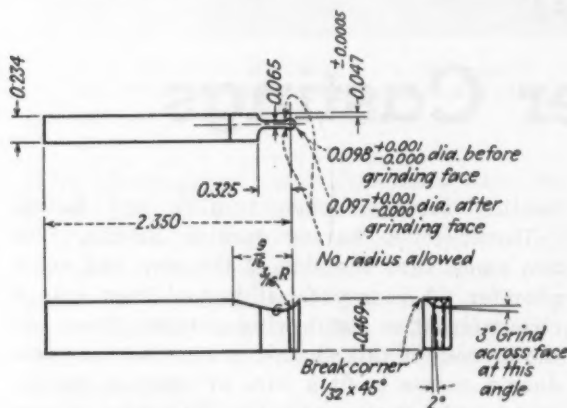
This special tool is used in the setup shown in Fig. 1, for cutting a circumferential wire groove of 0.098 in. diam in typebar segments.
